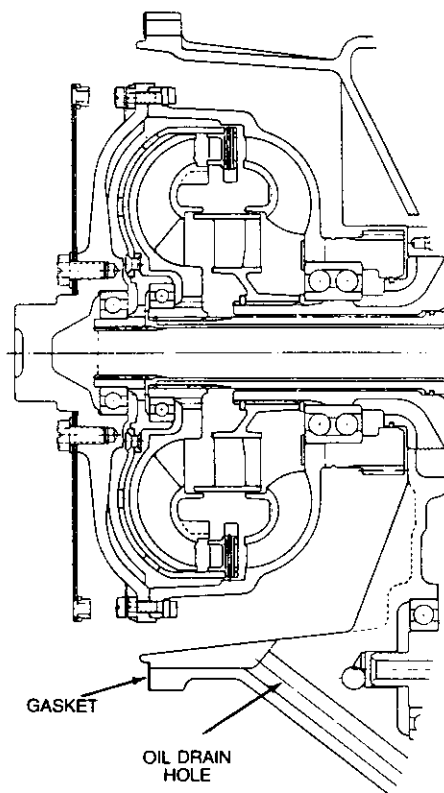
SAE engine-to-transmission adaptation for the wet housing
